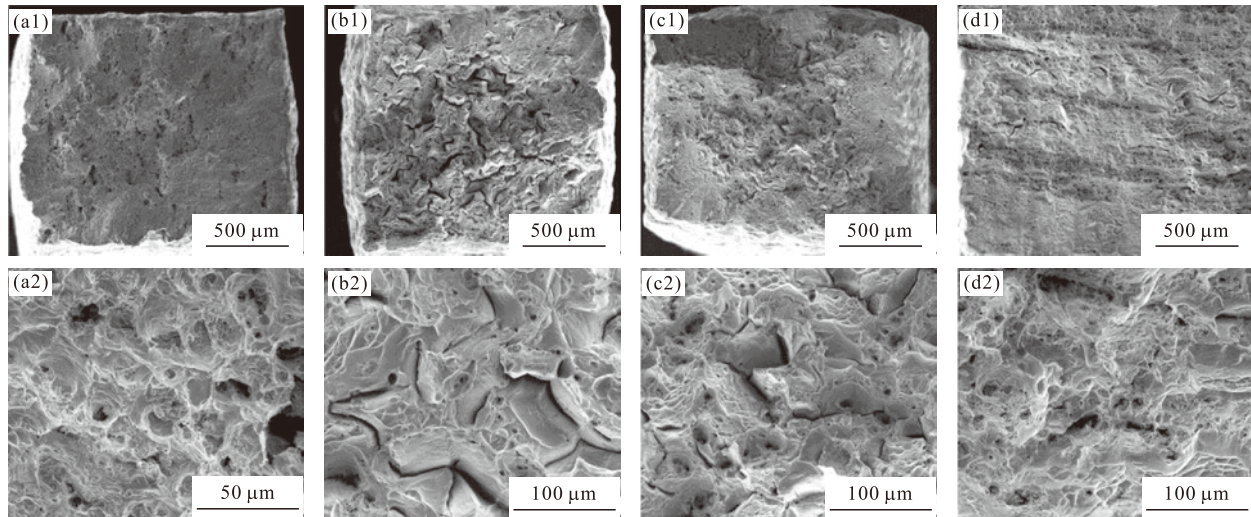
Fracture surface: (a1, a2) fracture of the ESR ingot; (b1, b2) fracture morphology of sample 1#; (c1, c2) fracture morphology of sample 2#; and (d1, d2) fracture morphology of sample 3#
